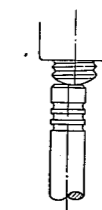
To ensure valve rotation, the tappet adjusting screw must touch the valve stem as shown.
